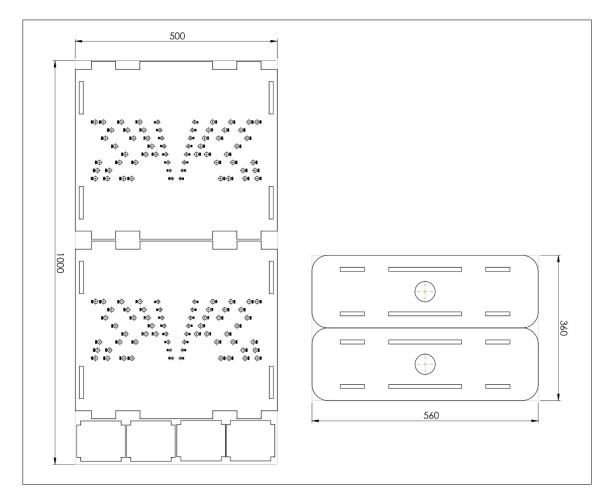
Steel sheets (1000× 500×10) mm and (560×360×20) mm
